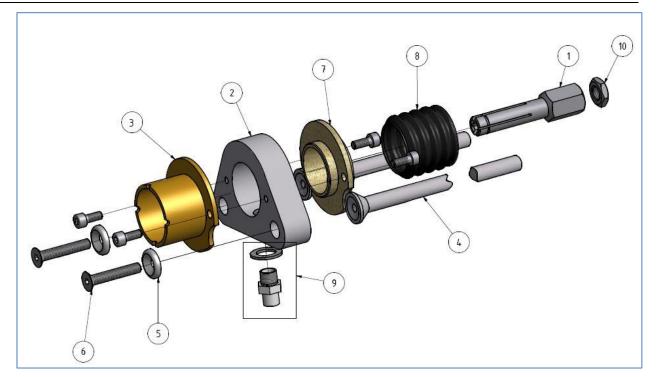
Gun accessories for stud welding with shielding gas (gun SK 14)
